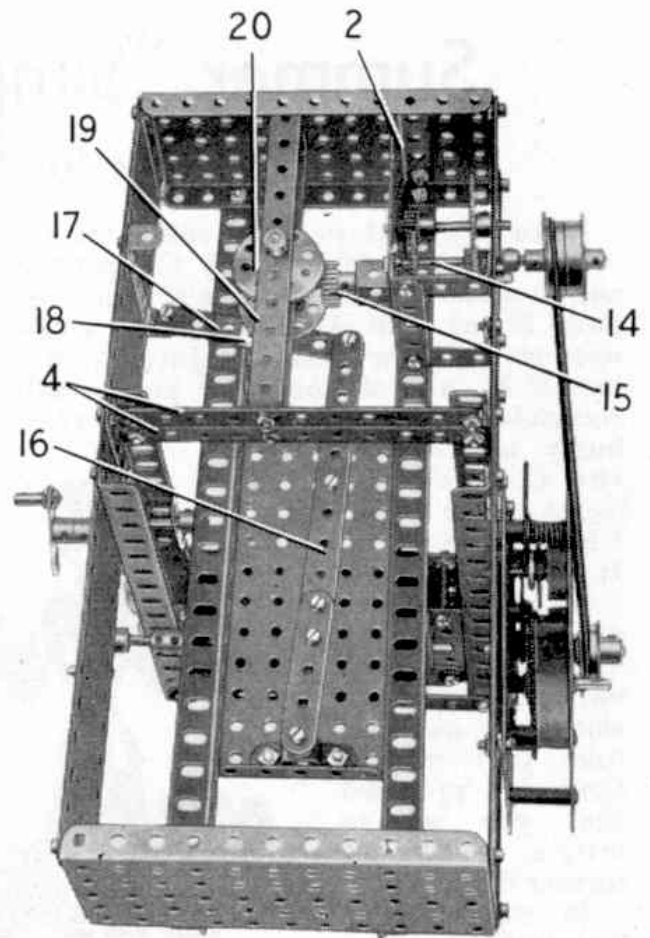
A view of the quick-return mechanism located under the worktable of the Planing Machine.
